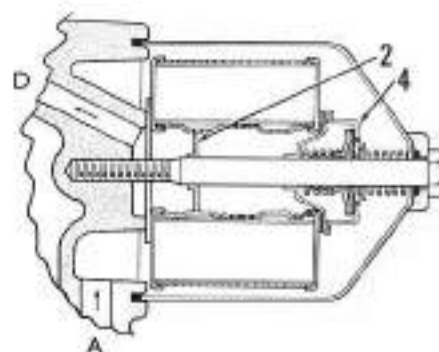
Cross-sectional view of oil filter. When pressure difference between inlet (A) and outlet (D) exceeds 10 psi, by-pass valve (4) opens to allow unfiltered oil to flow past filter. Locating plate (2) should be tight fit on cap screw.
